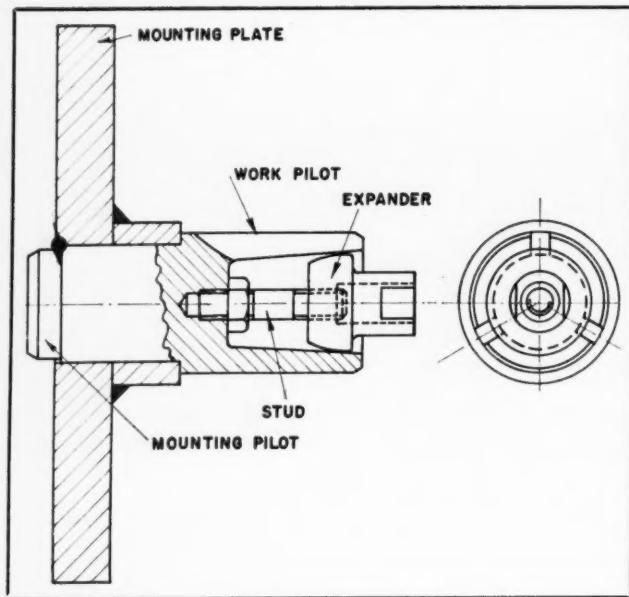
This sketch shows an expansion type of second-operation fixture designed to provide a high degree of concentricity of the machined surfaces of the workpieces.
